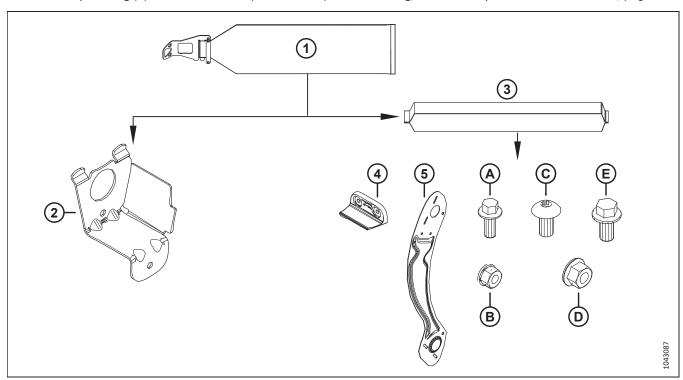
Left Reel Parts Retrieved from Parts Bag MD #368324
